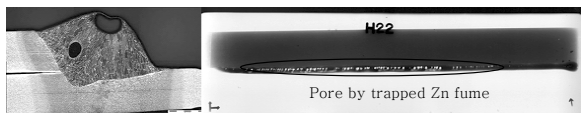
Weld cross section and X-ray image for MAG weld of HGI DP590
